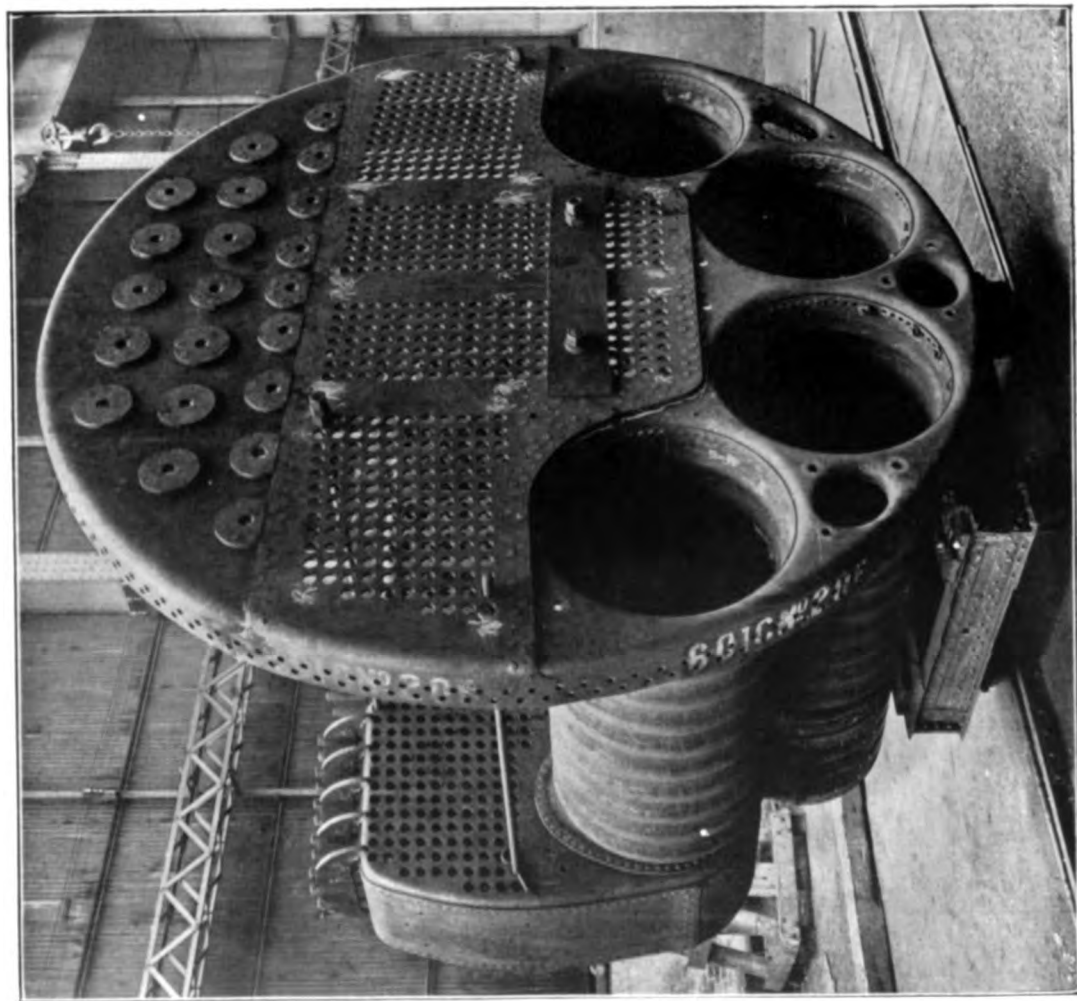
VIEW SHOWING BOILER FRONT, WITH FURNACES.
